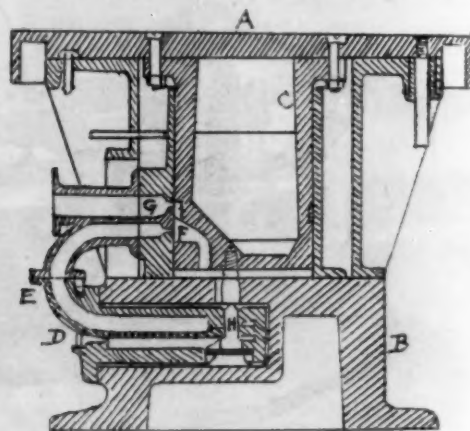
SECTIONAL VIEW OF A TYPICAL JAR-RAMMING MACHINE
